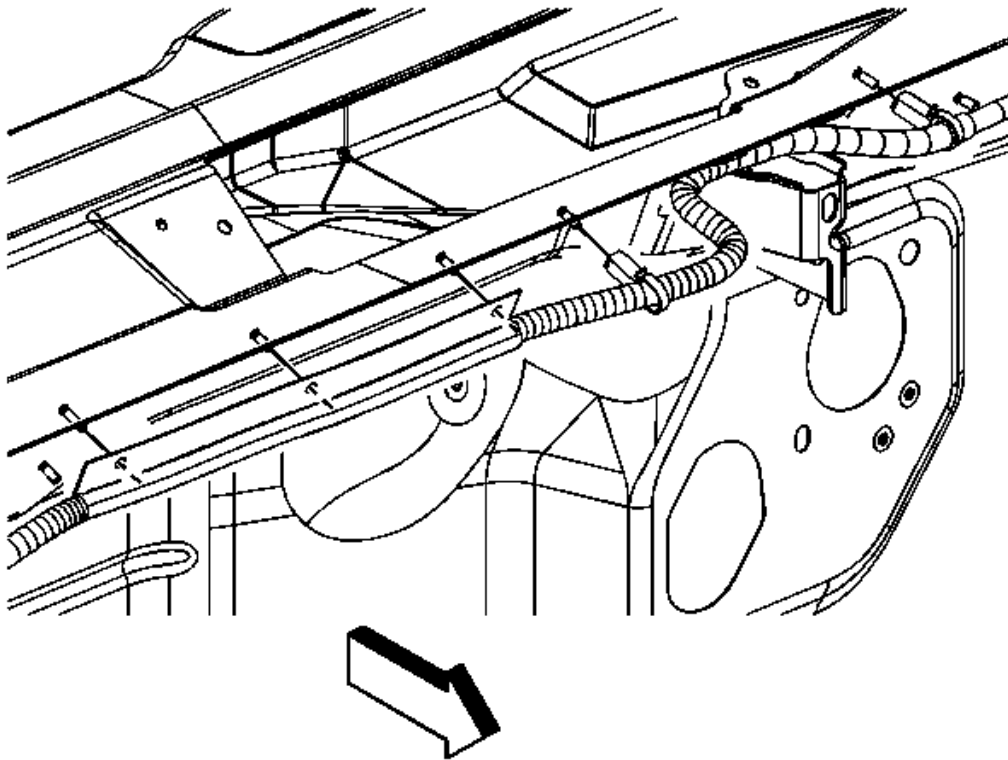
View Of Positive Battery Cable Channel, Clips & Studs
